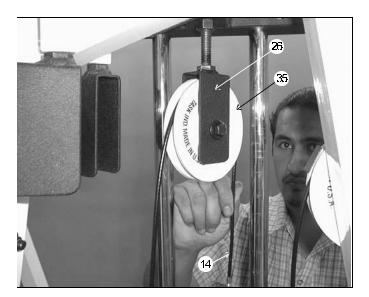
Insert a Nylon Pulley 4 1/2 Rd. (#35) into the Adjustable Pulley Bracket (#26) and secure it using one Hex Head Cap Screw 3/8-16 X 1 3/4 (#79), two Flat Washers SAE 3/8 (#90) and one Nylon Insert Jam Lock Nut 3/8-16 (#86). Route the Lat Cable (#14) through the Adjustable Pulley Bracket (#26), as shown above.
